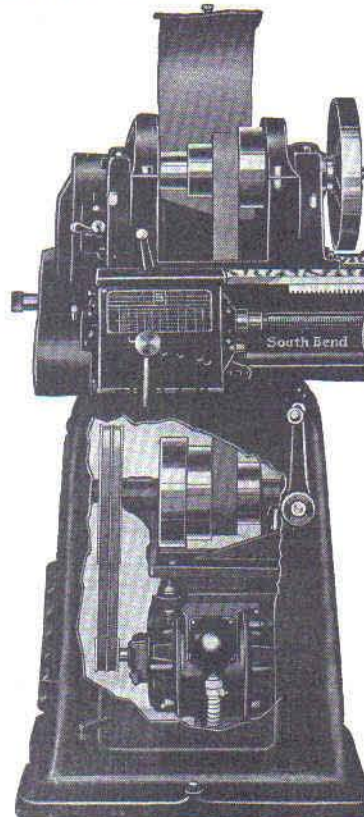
Front View of Lathe with Underneath Belt Motor Drive Unit.
